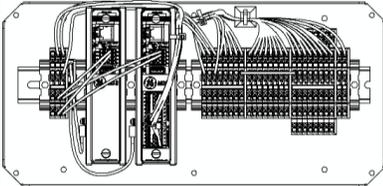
Example diagram of an Accessory Plate mounting showing IOX-T, IOX-R, 26 IO Assembly
